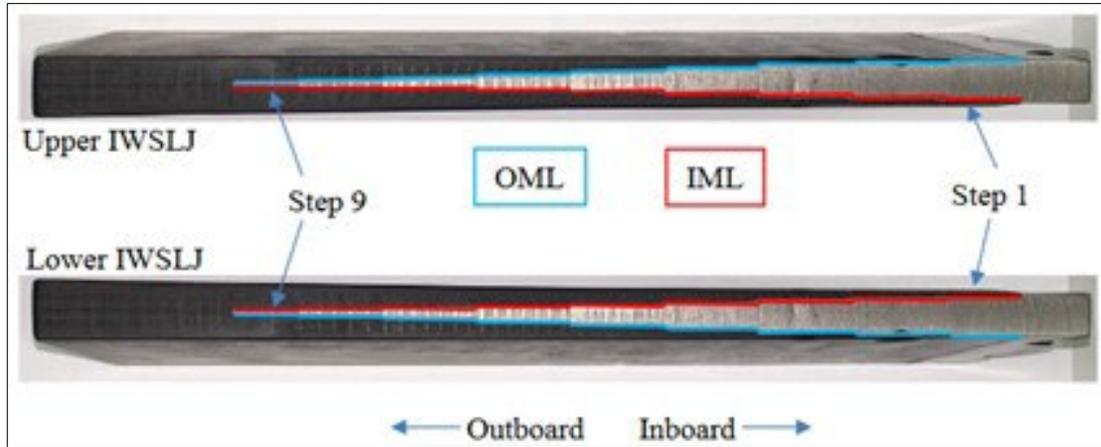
Upper and Lower IWSLJ cross-sectional view with the locations of the Outer and Inner Mould Line (OML/IML) [6].
